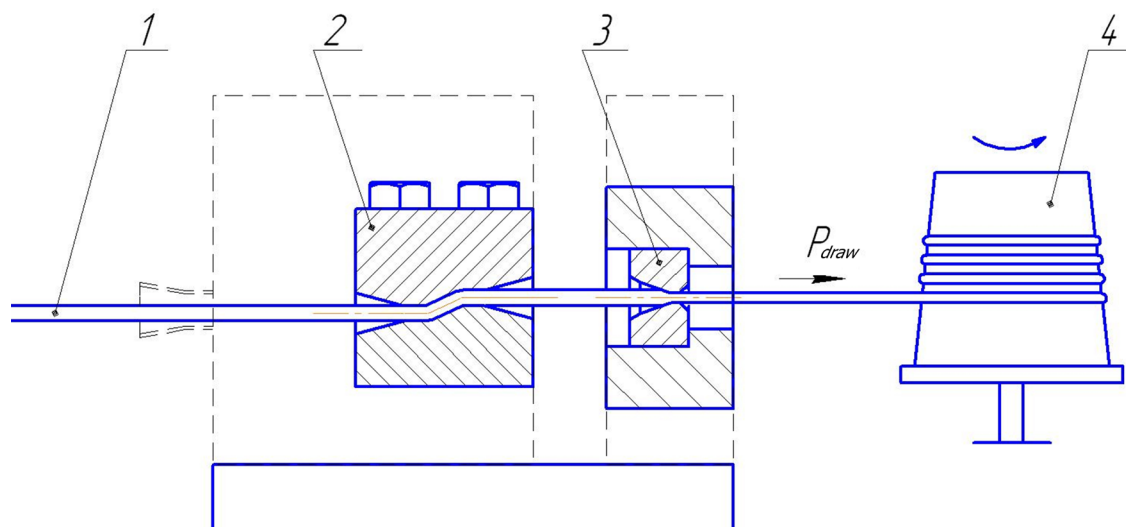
Scheme of process of sequential broadening of the workpiece through equal-channel step matrix and drawing die: 1 - original billet, 2 - equal-channel angular step matrix, 3 - drawing die, 4 - drum of drawing mill.
